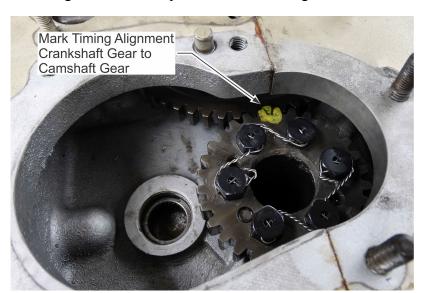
Camshaft Gear Timing Alignment Marked, Sandcast Crankcase WARNING
